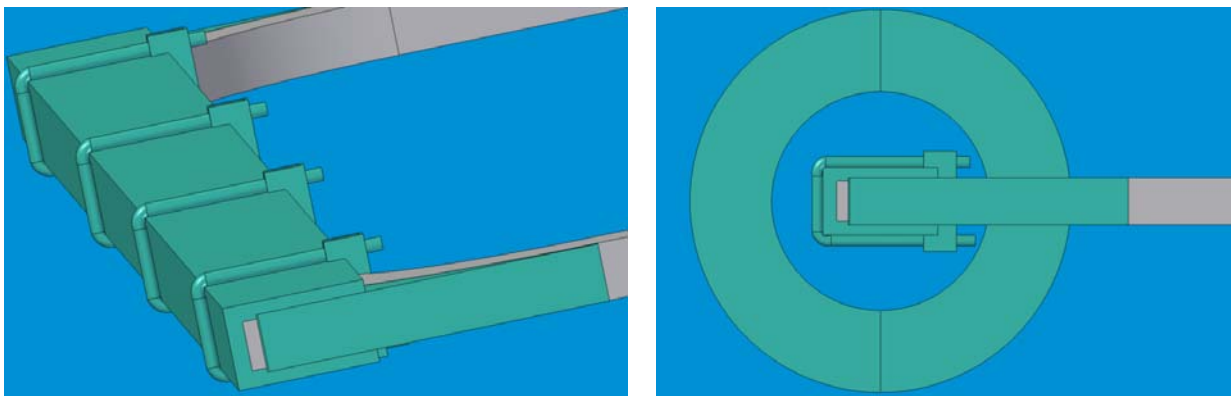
Assembly drawing of the HETRA mock up including heaters and insulation.
